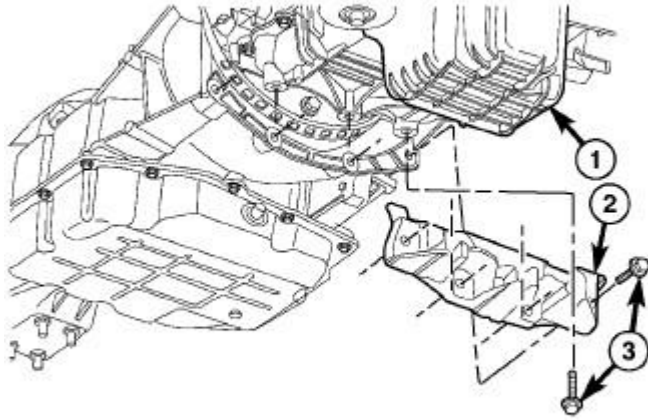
Removing/Installing Torque Converter Access Cover - 3.5L
